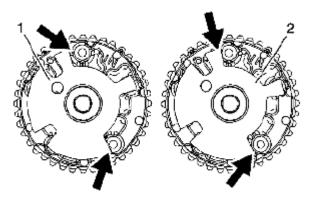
Identifying Body Of Camshaft Position Actuator For IN Marking Courtesy of SUZUKI OF AMERICA CORP.
